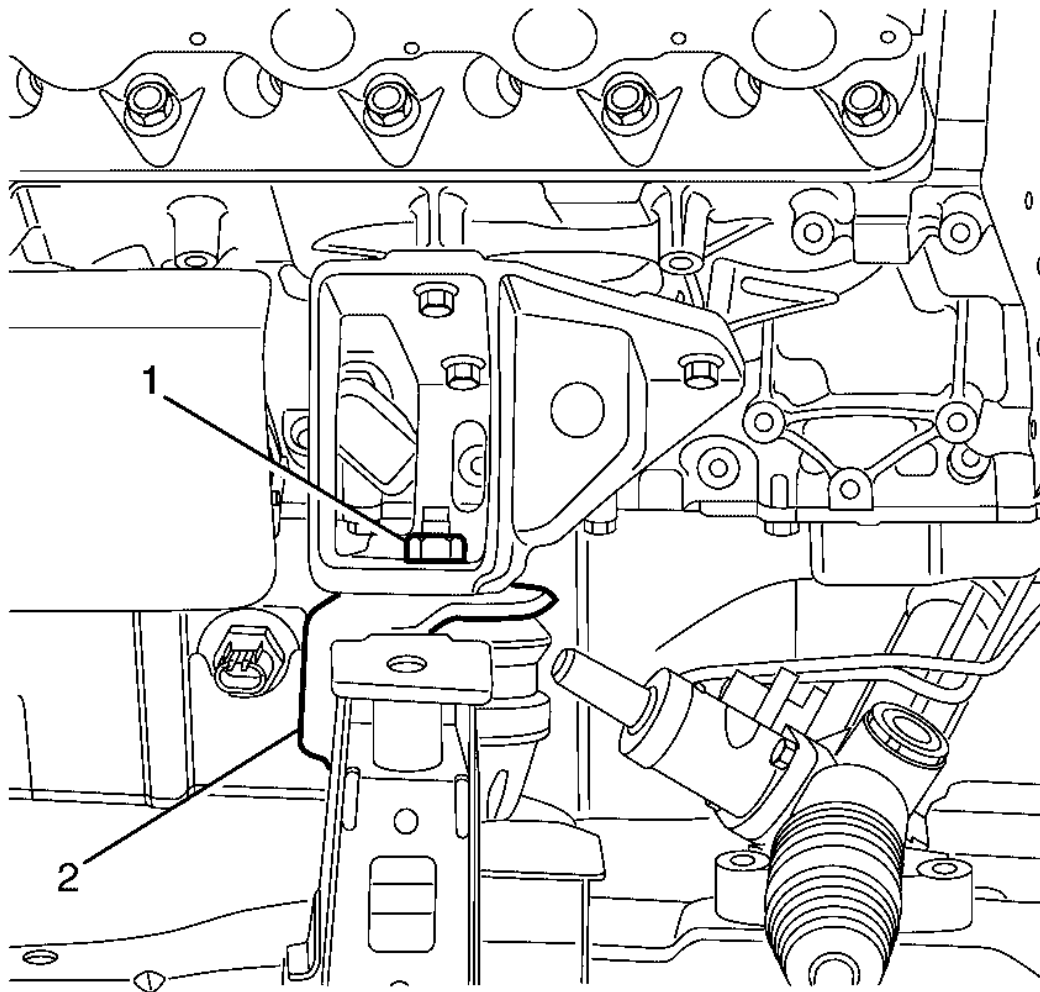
Identifying Upper Right Side Engine Mount To Engine Mount Bracket Retaining Nut
